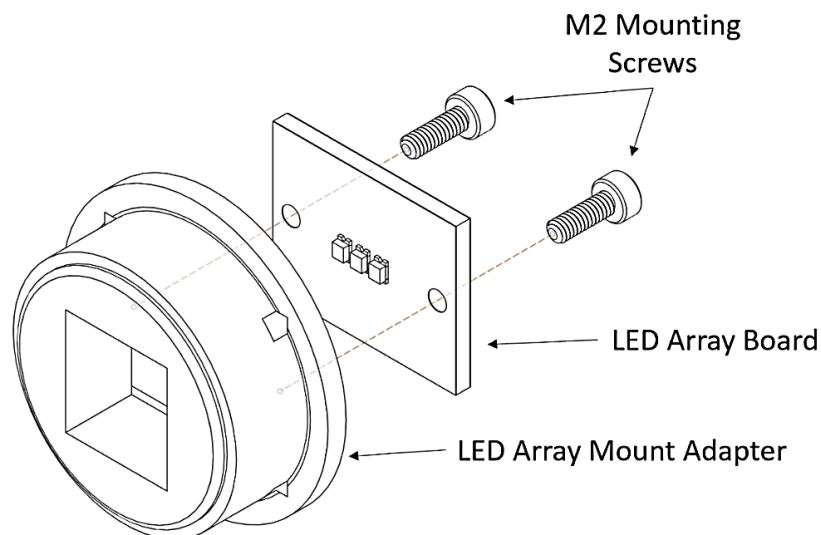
Image of mounting system for LED Array using mounting adapter for the CP33/M threaded optical mount.
